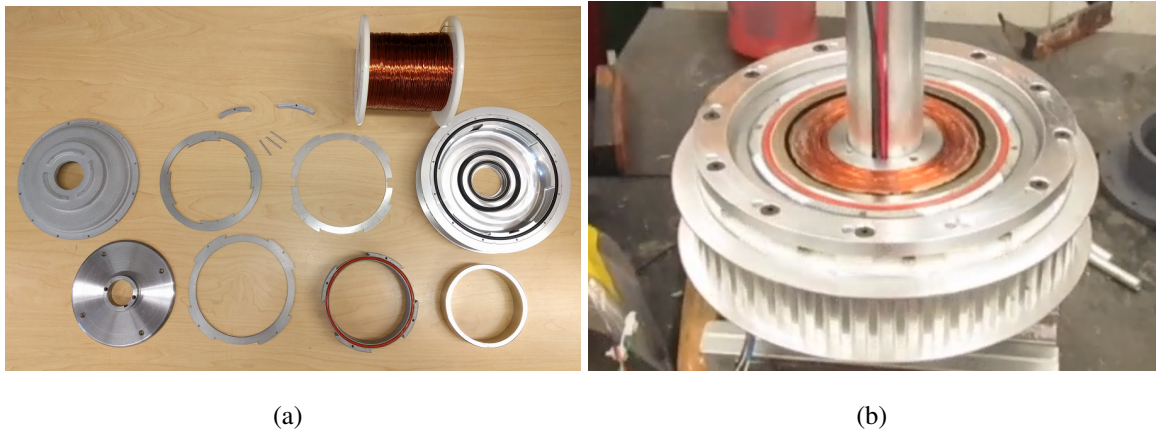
Prototype of the hybrid MR clutch. (a) Components of the prototype. (b) Assembly of the prototype.
